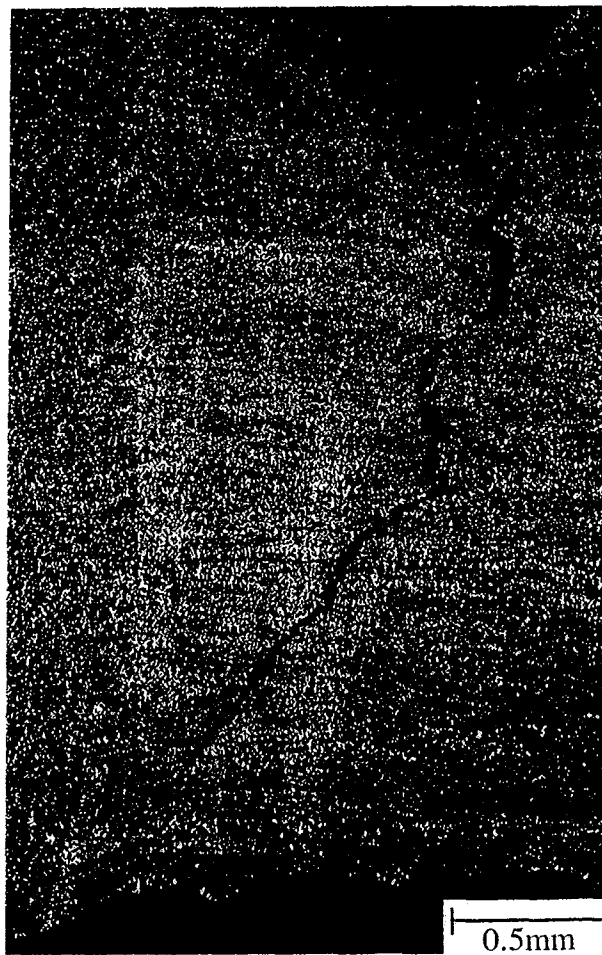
Crack growth in the weld metal deposited using electrode C.
